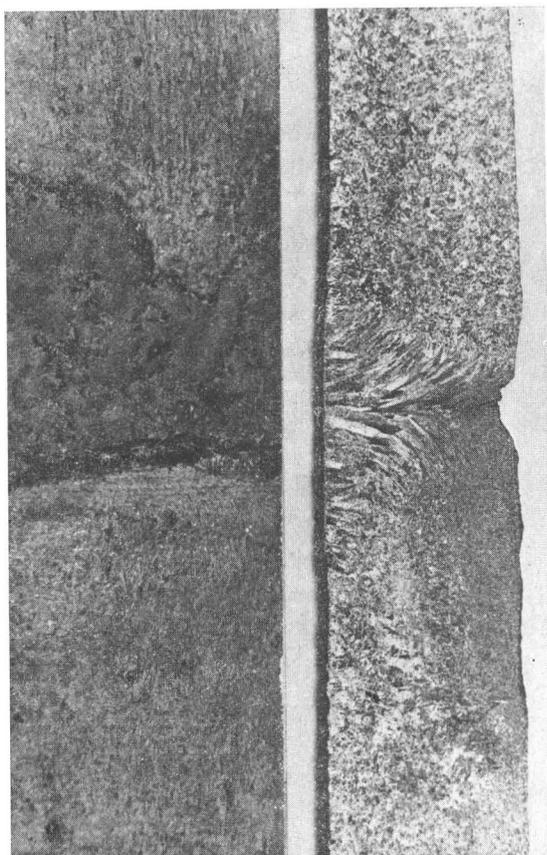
Localised carburisation at an under-penetrated weld in a pyrolysis tube from a medium severity ethylene furnace.
